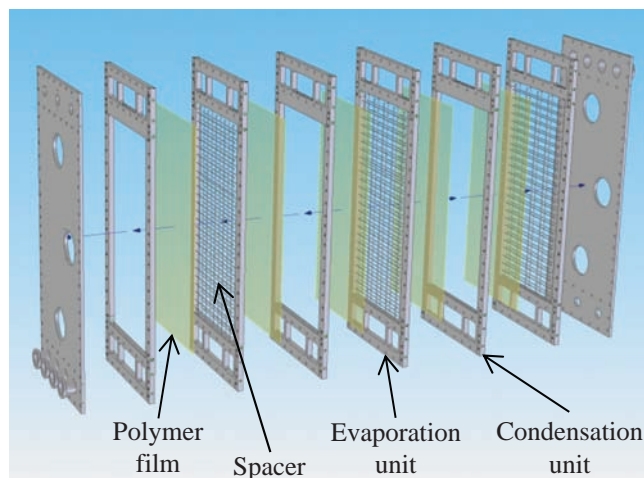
Exploded assembly drawing of the novel polymer film heat exchanger.
